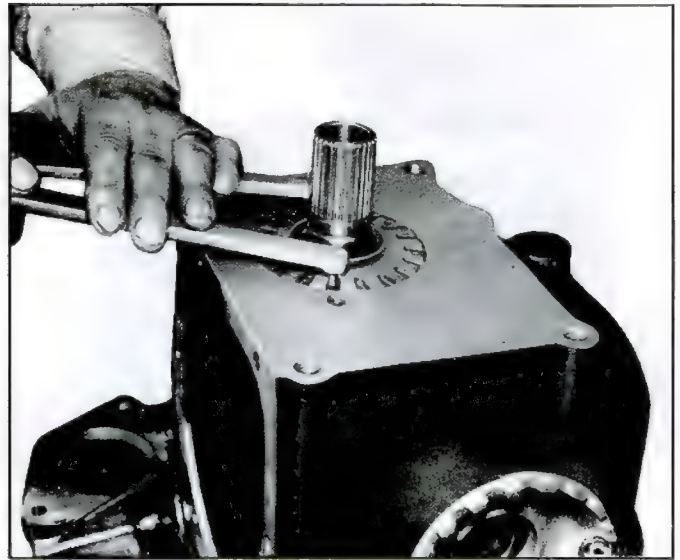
Tightening Pinion Bearing Adjusting Sleeve with J-972
